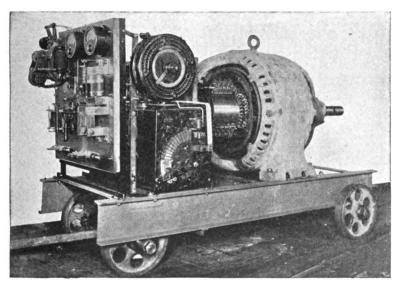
600-Ampere Portable Single-Unit Welding Outfit Courtesy of C. & C. Electric and Manufacturing Company
